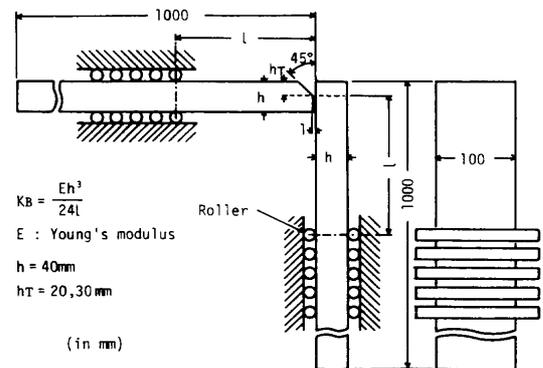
Apparatus for Corner Joint Weld Cracking Test (CJC-test)
